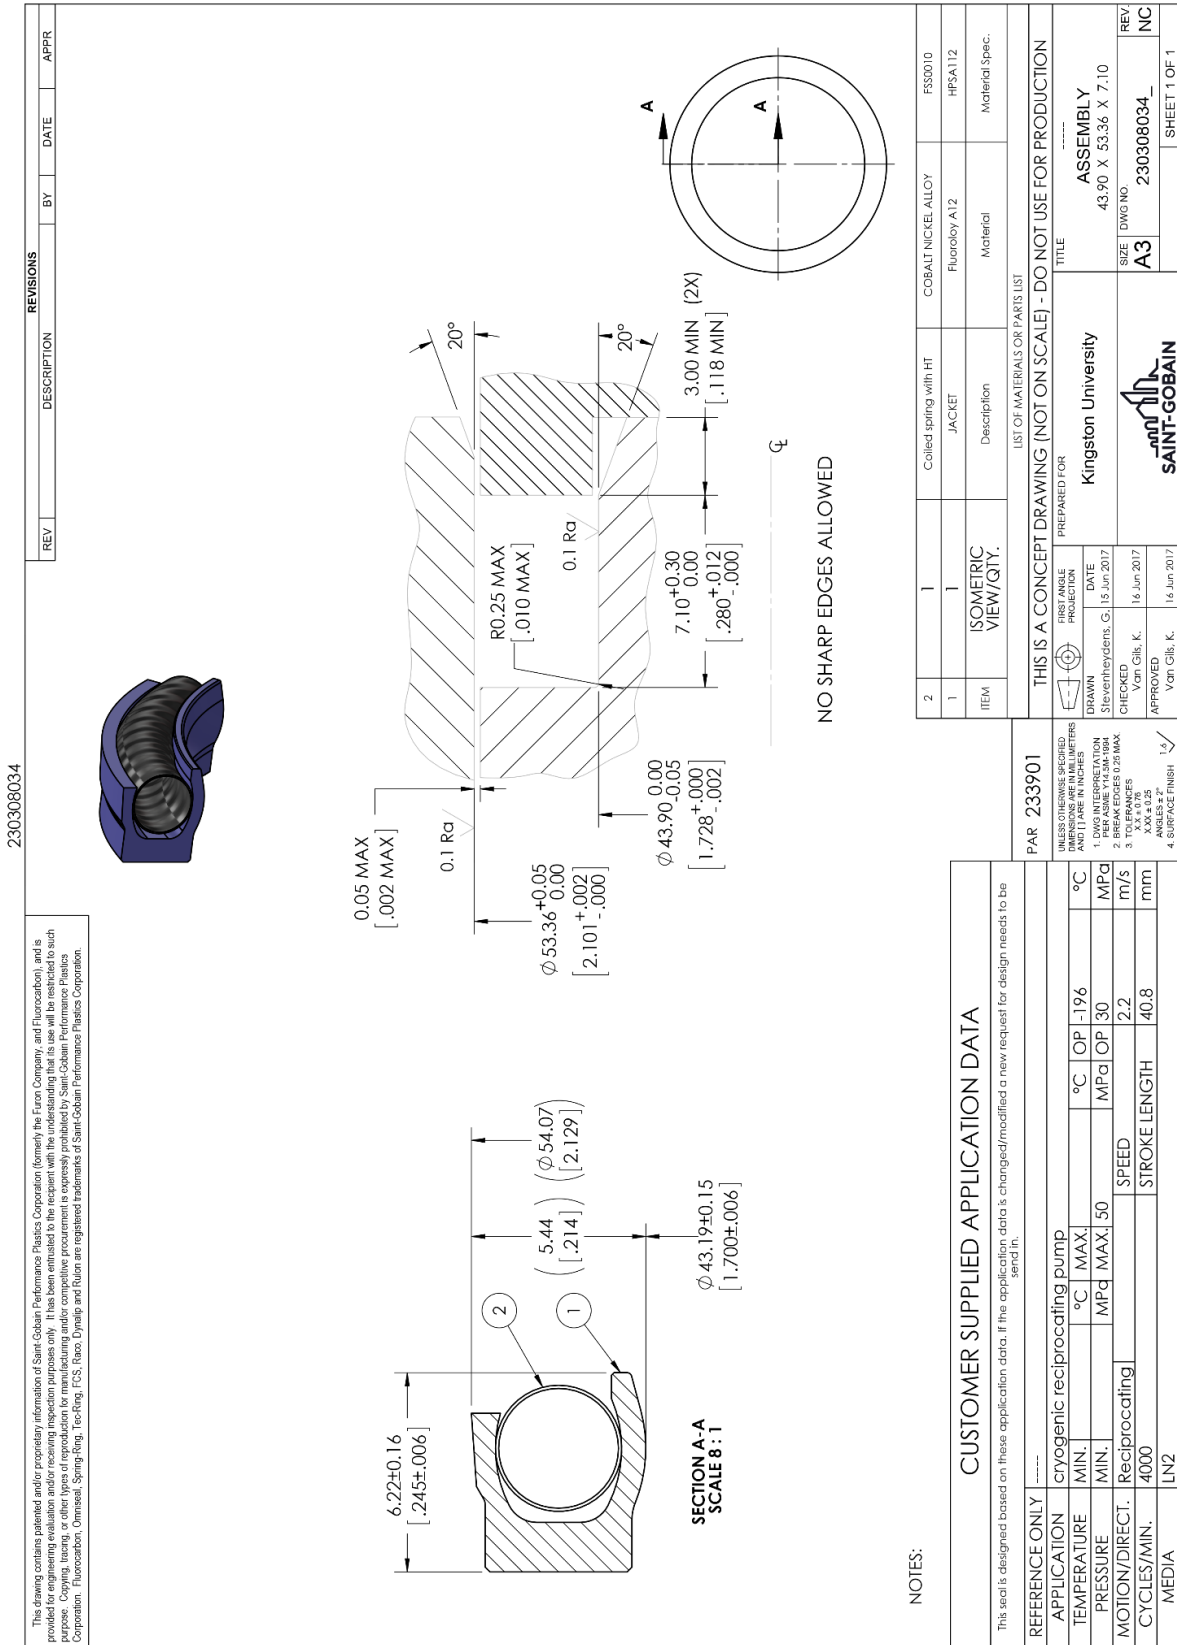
Fluoroly A12 Seal Drawing with a Coiled Stiffener
